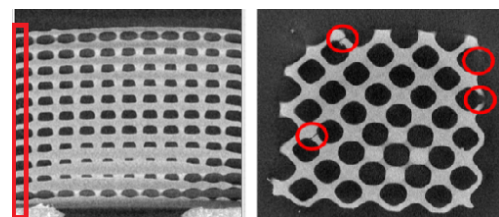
Examples of cracks, and side edge defects, caused by the printing process.
